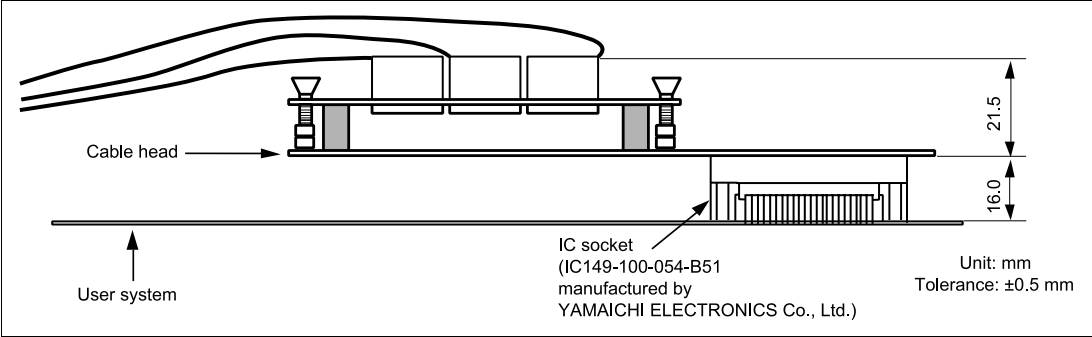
Resulting Dimensions after Connecting User System Interface Cable
